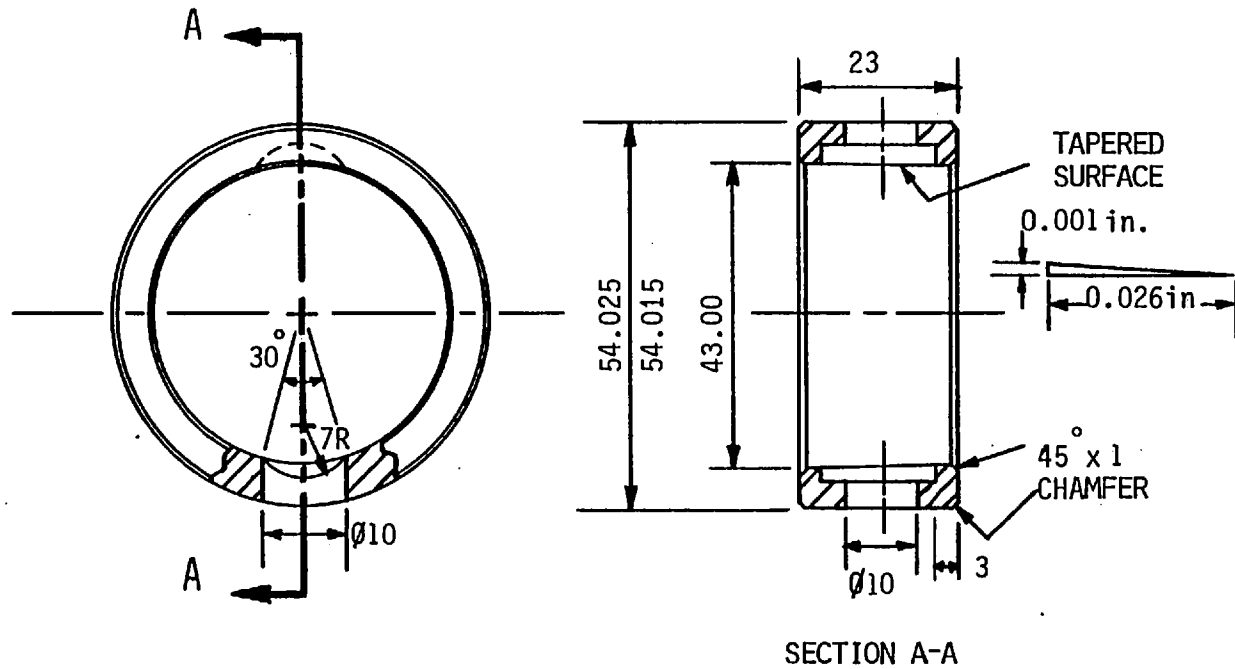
CIRCULAR TWO AXIAL-GROOVE BEARING
